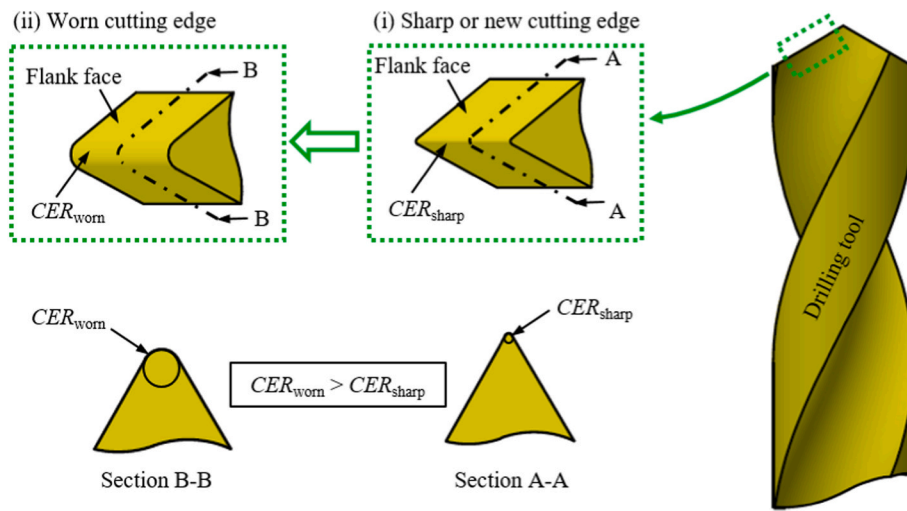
Cutting-edge rounding (CER): (a) sharp cutting edge; (b) rounded cutting edge (redrawn based on Ref. [47]).
